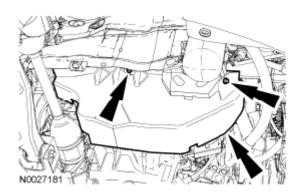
Locating Oil Pan Bolts Courtesy of FORD MOTOR CO.
